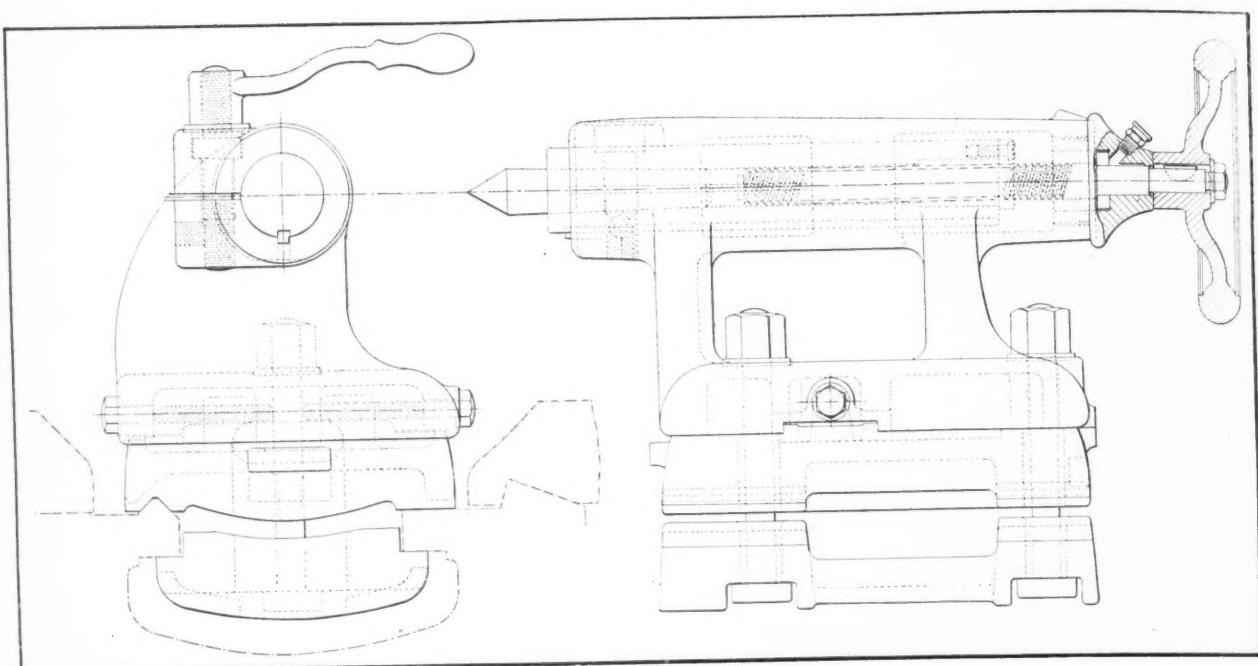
Adjustable Bearing Tailstock of 11-inch Lathe
